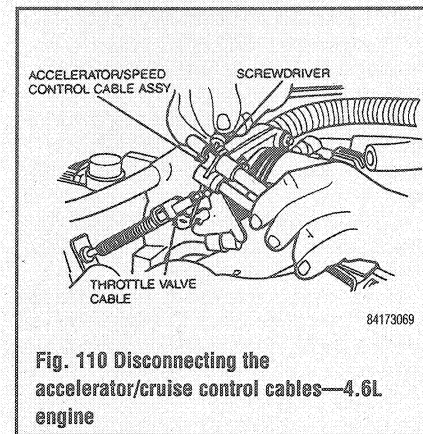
Disconnecting the accelerator/cruise control cables—4.6L engine
